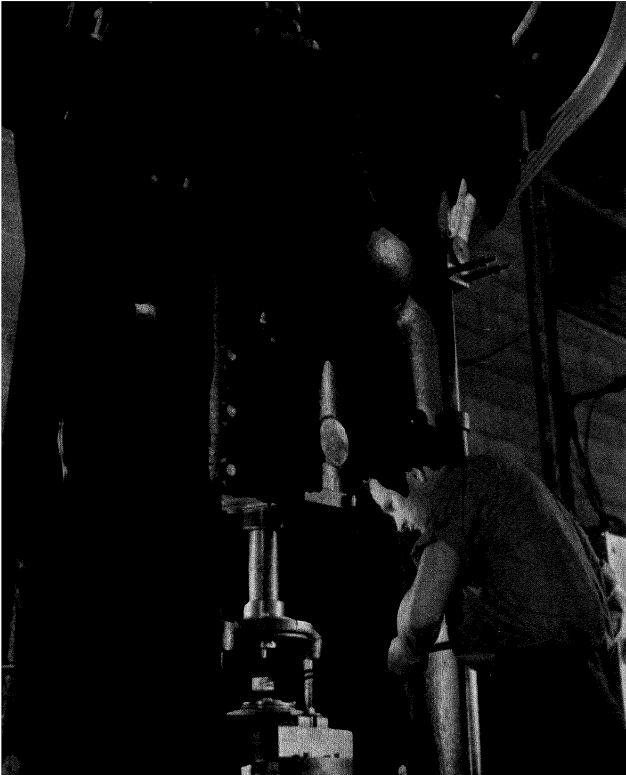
Hot forging of steel casing around the cemented carbide die nib in a wire-drawing die (courtesy of Carboloy Co., Inc.).
